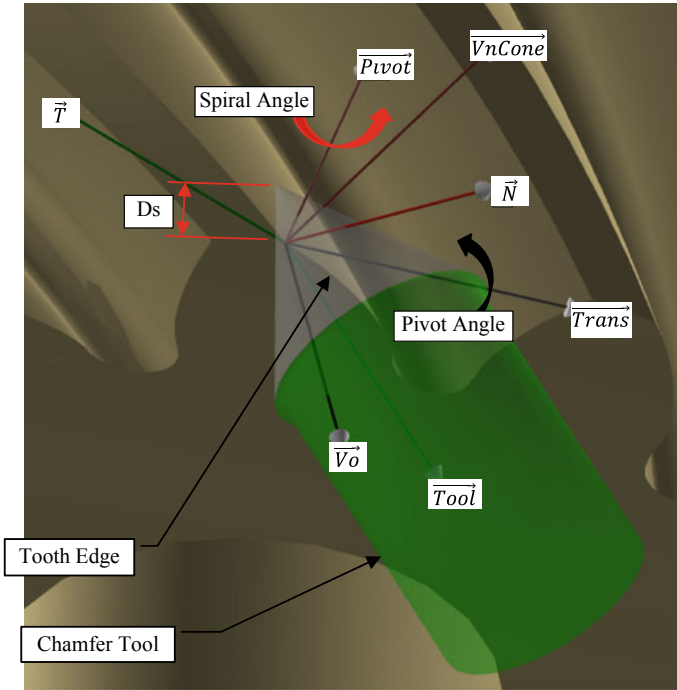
Chamfer Tool installation for Toe/Heel chamfering—Spiral Bevel Gears
